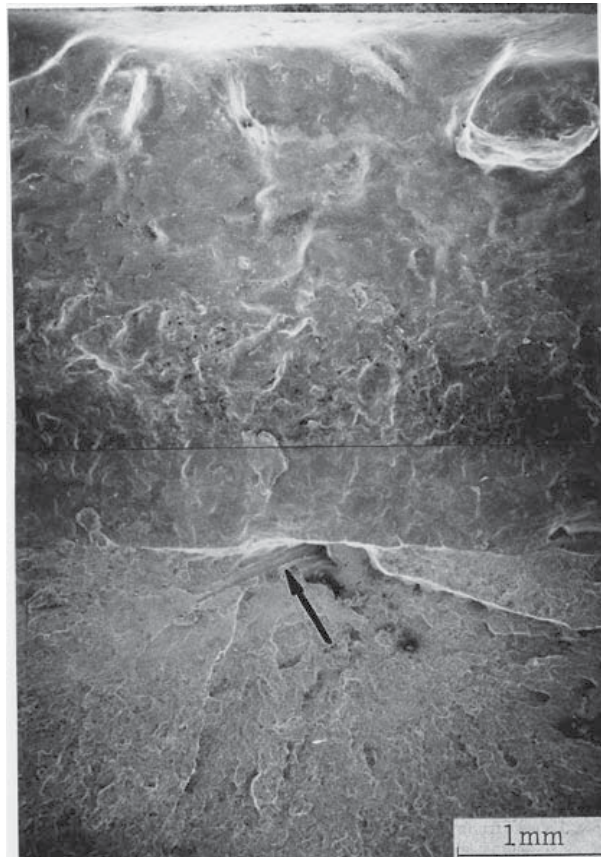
Fracture surface of a flange yolk forging die [2]. Arrow shows MnS where impact failure initiated
